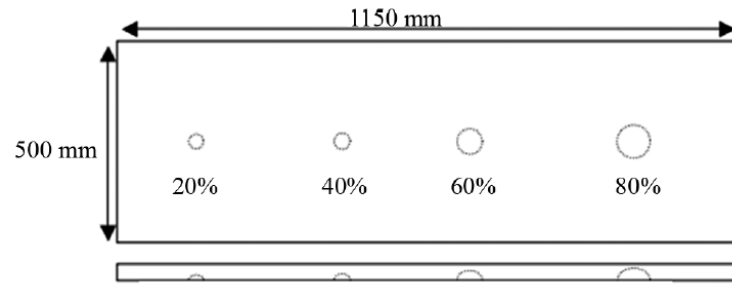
Showing typical calibration plate with multiple holes to be machined with a ball-end cutter.
